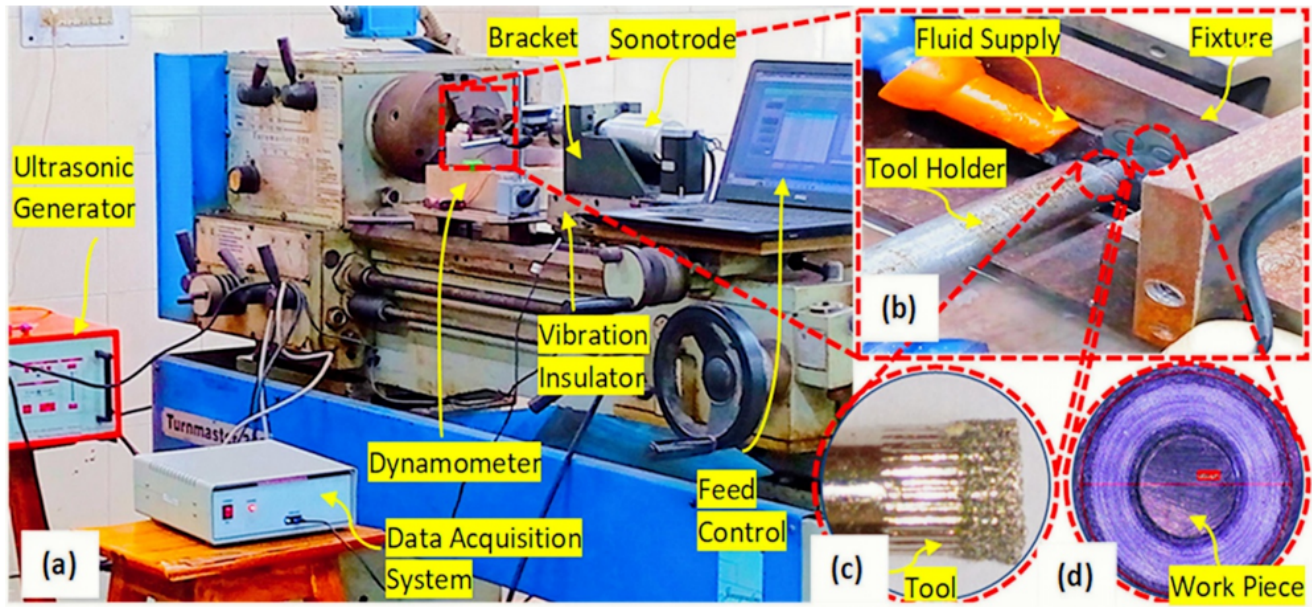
Diagrams of CRUM system (a) Setup (b) Fixture, fluid supply (c) Cutting tool (d) Workpiece
